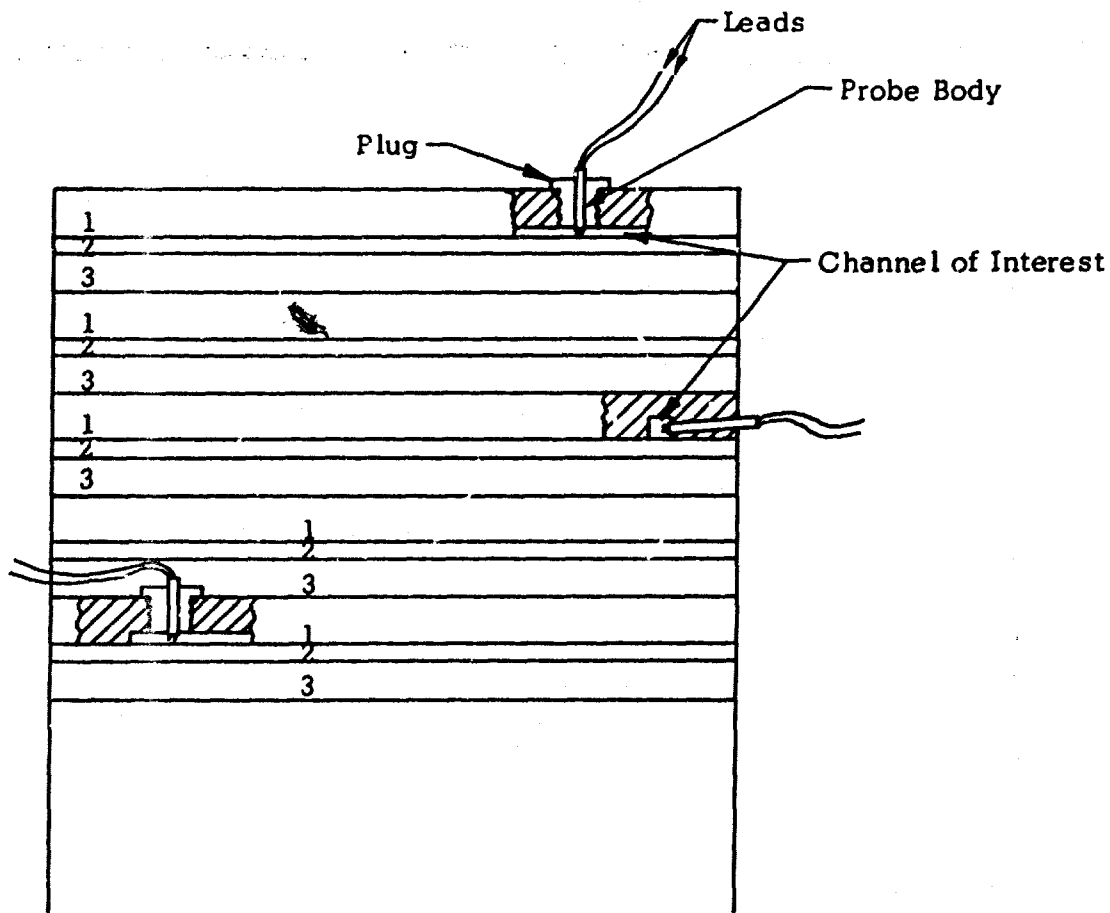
HOT WIRE MOUNTING FOR STACKED CIRCUIT
